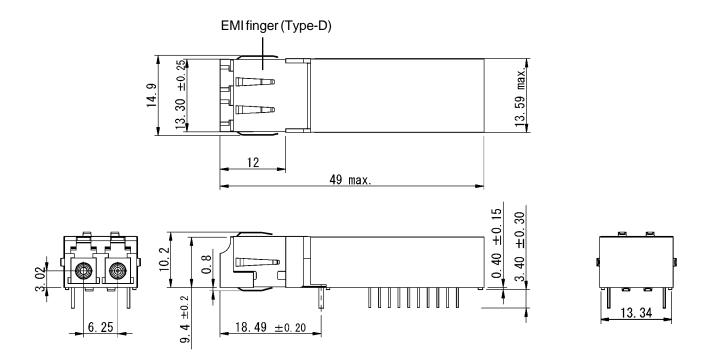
Outline Dimensions (SCM6001-JL-Z#)
